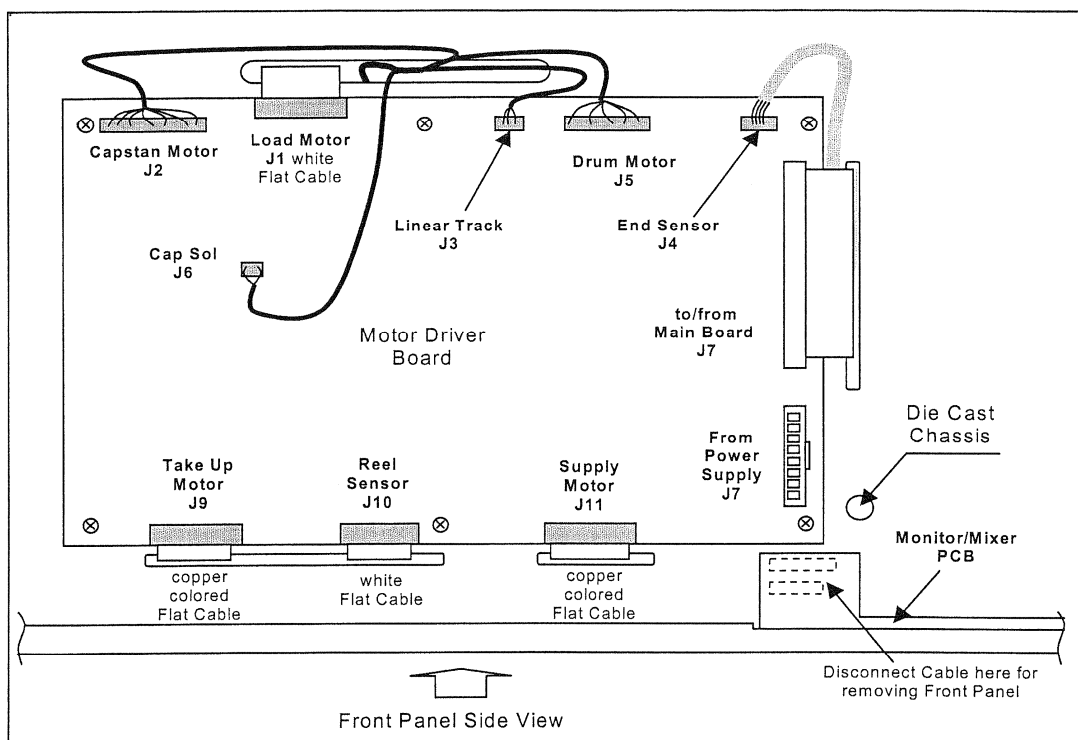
Cable and Connector Placement (Motor Driver Board)
